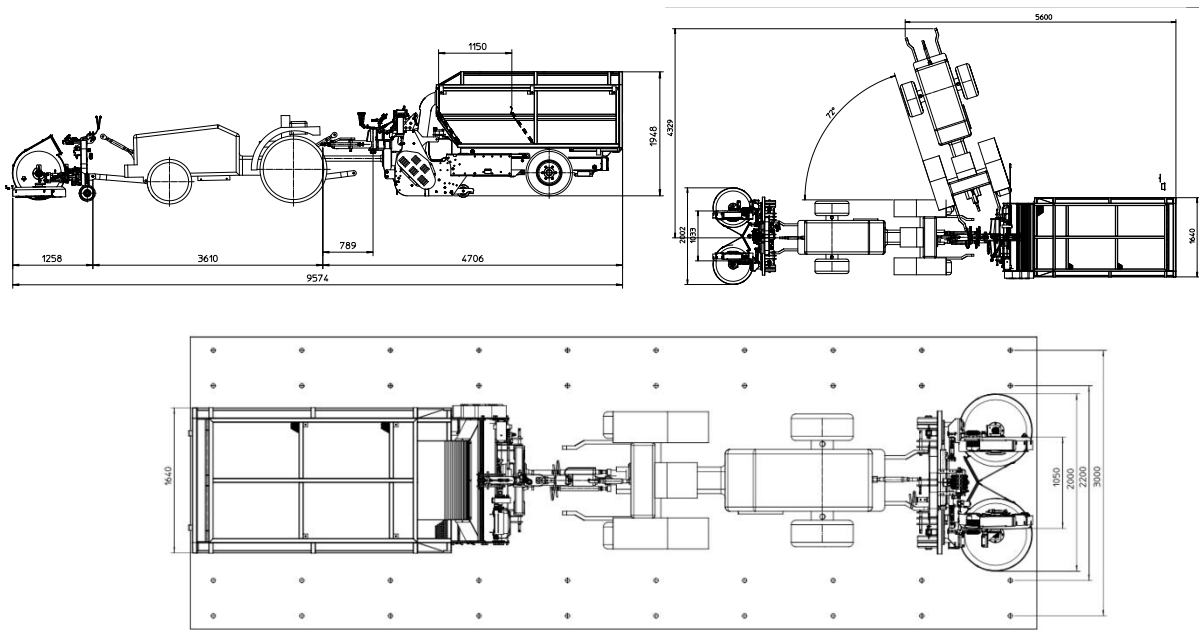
Technical drawings of the final version of the machine [Courtesy of BERTI Macchine Agricole]
